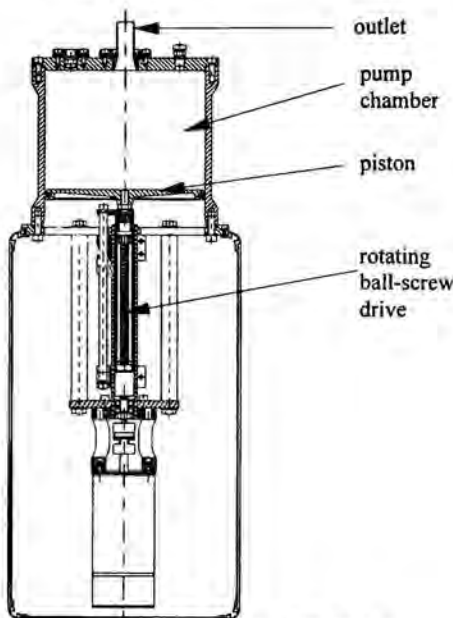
Technical drawing showing the pump's chamber, piston, drive, and motor.
